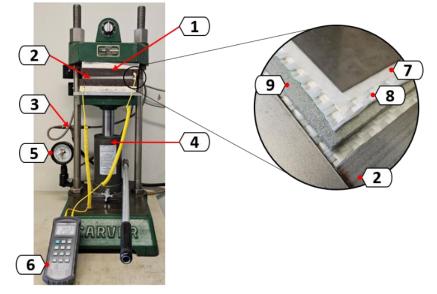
A display of the compression molding fabrication procedure of sandwich panels using the hot press machine.
